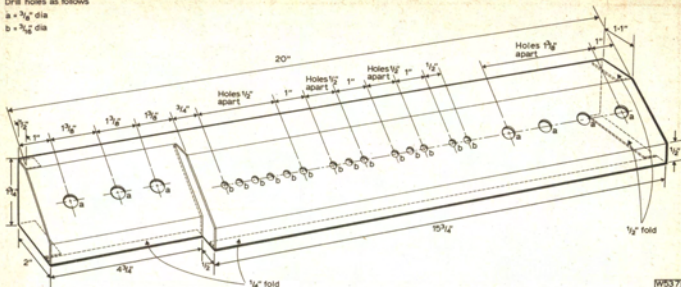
Back panel assembly. The dimensions are for guidance only.
